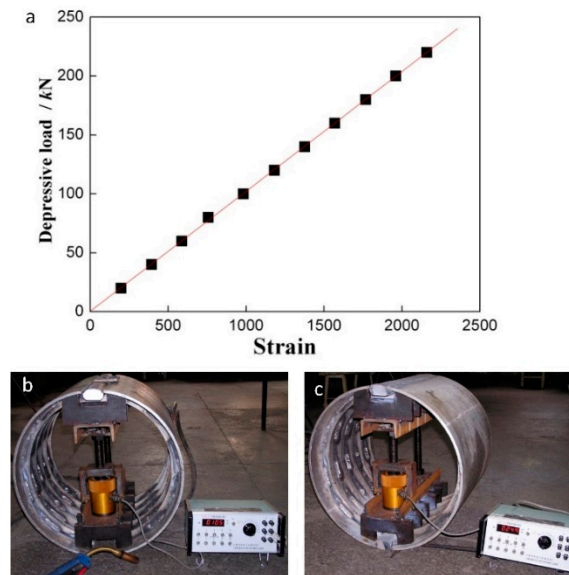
Depression load and strain measurement of strain before and after welding. (a) Relation of welding depression load and strain (b) Depression strain before reinforcing plate welding (c) Depression strain after reinforcing plate welding.
